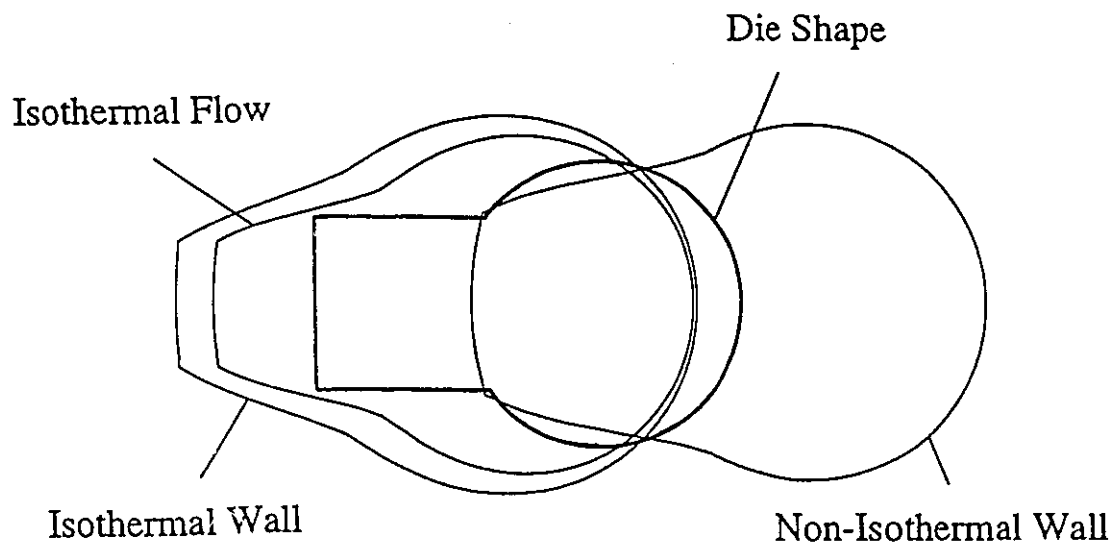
Superposed final extrudate shape and die shape for the key-hole dies of Figures 3.20-3.22.
